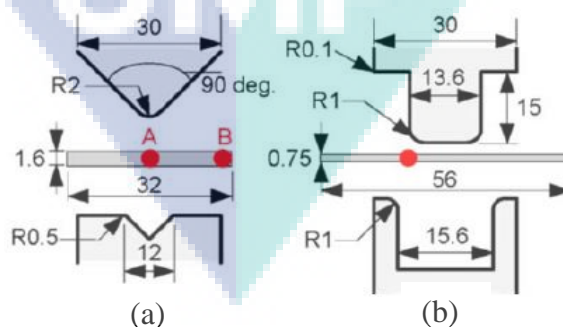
Geometries of die and test piece for (a) V-bending and, (b) U-shape
